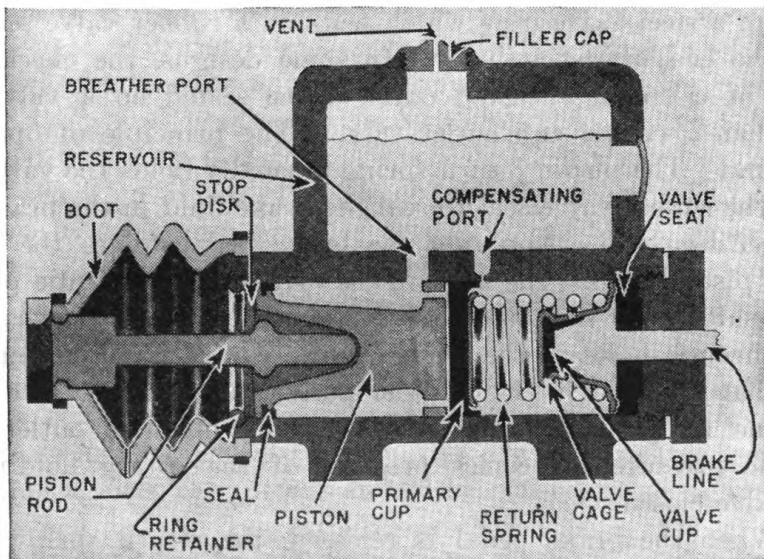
Sectional view of master hydraulic brake cylinder.
